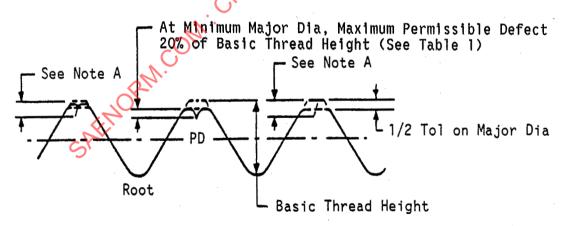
Laps Extending Towards Crest, Rolled Thread
